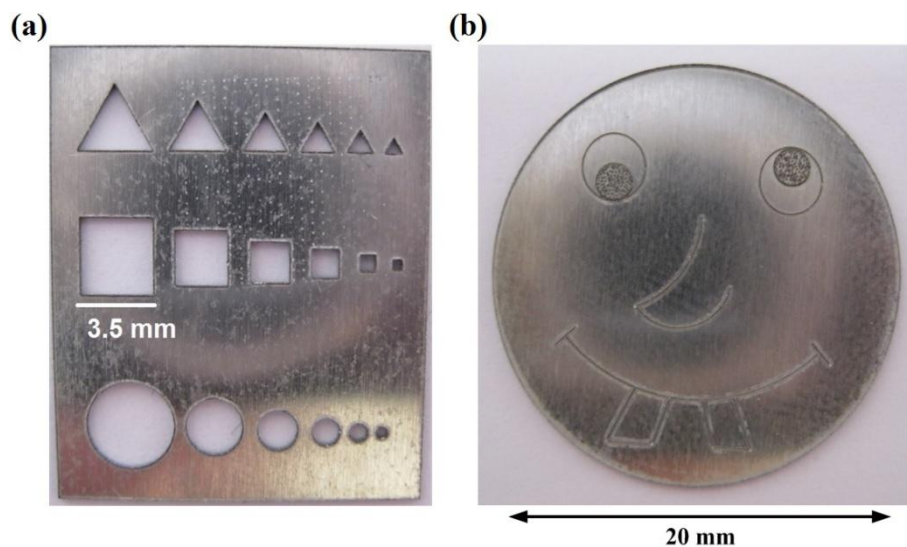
Examples of machining of the 0.3 mm thick aluminium sheet with the NCF delivered ns pulses at 1064 nm: (a) through cutting; (b) through cutting and marking.
